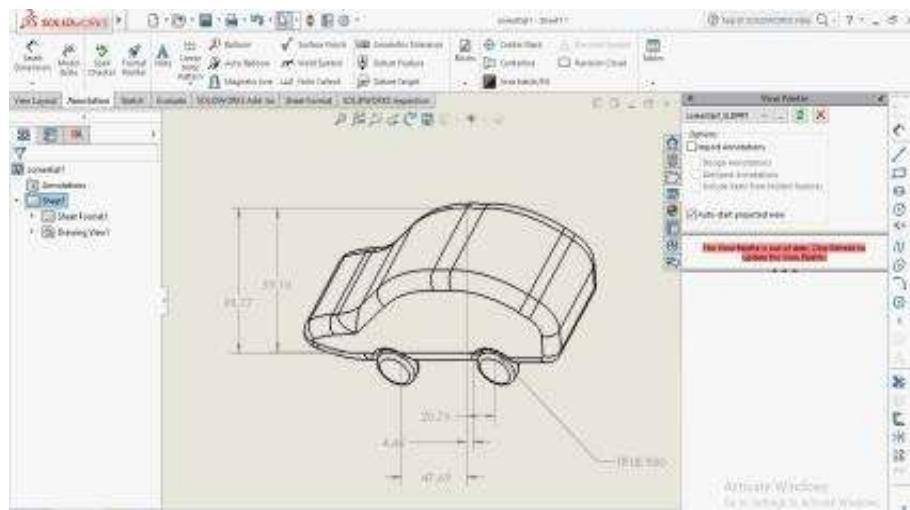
Commercial Car Model with Dimensions Isometric View
